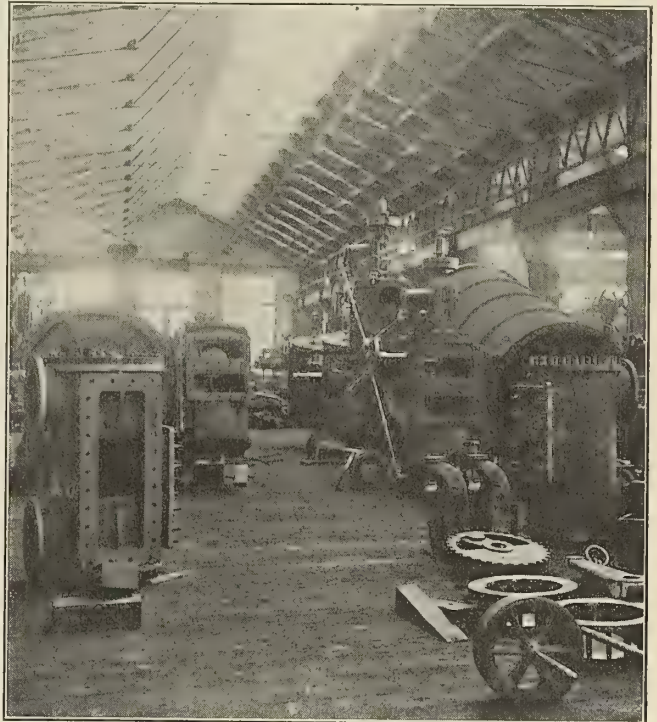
View of Main Engines, Being Assembled in the Southern Pacific Company's Shop at Sacramento
